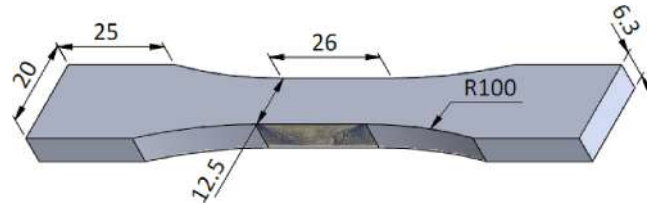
Dimensions of fatigue samples modeled in CAD software (in mm).
